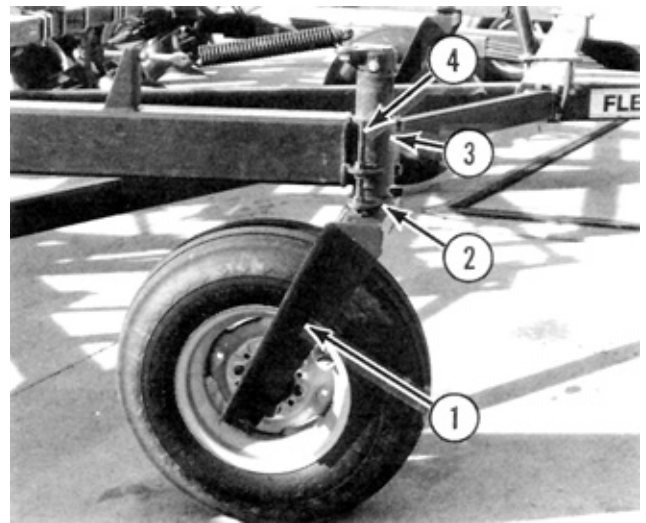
Outrigger Castor Fork: (1) Castor Fork Assembly, (2) Castor Adjustment Sleeve, (3) Castor Housing, (4) Castor Housing Adjustment Bolt.
